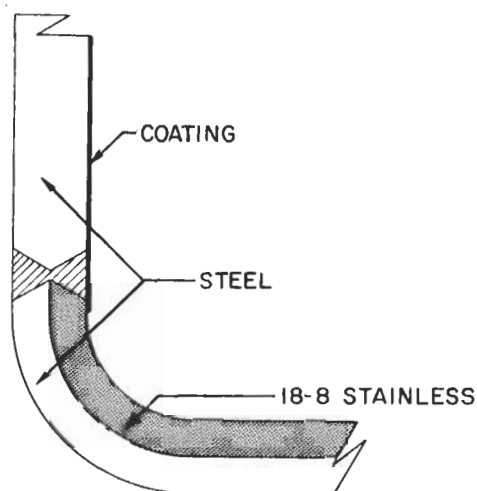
Detail of Welded Steel-Stainless Clad Steel Tank Construction
